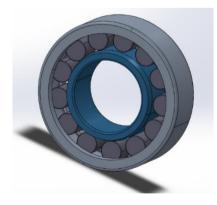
3D model of the cylindrical roller bearing (NU205E.TVP2.C3)
